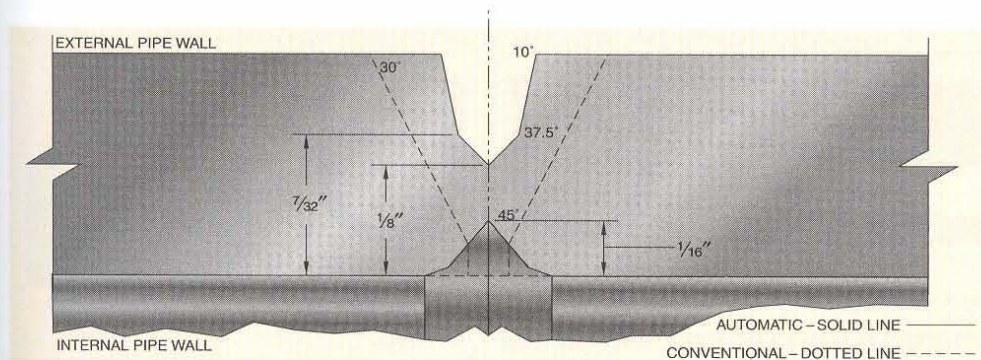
The bevel on a pipe can be adapted for automatic welding to allow for differences in penetration of the welds.
